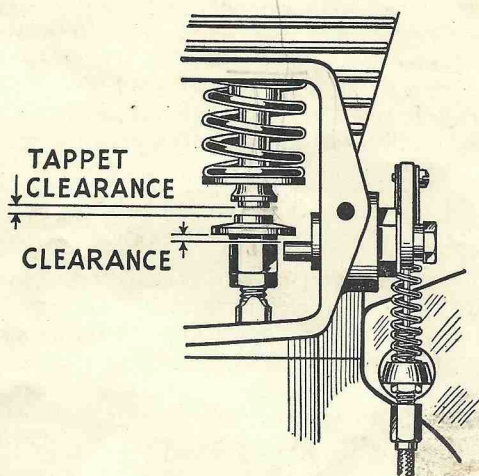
Tappets and Exhaust Valve Lifter (M21).
